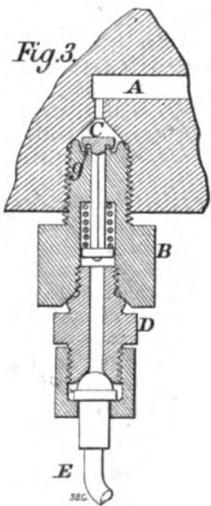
DETAIL DRAWING OF INLET-VALVE.
